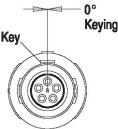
Panel Mount Receptacle Assembly illustrating the key
